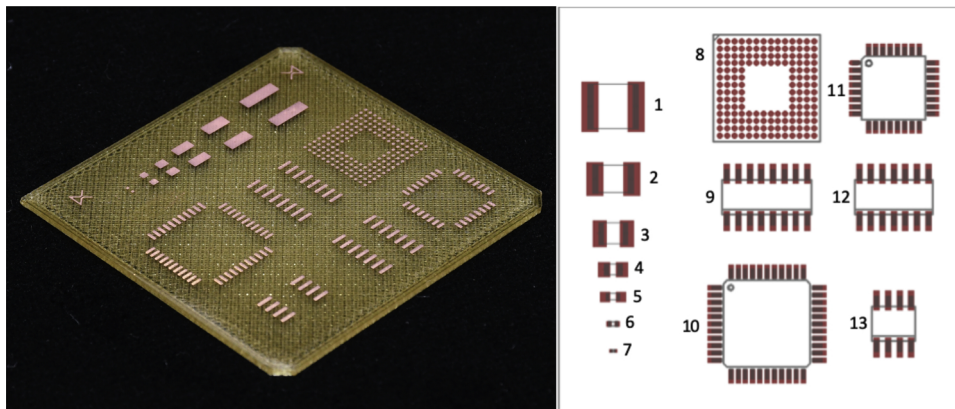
(left): image of Cu bond pads, (right) Component pad layout.
